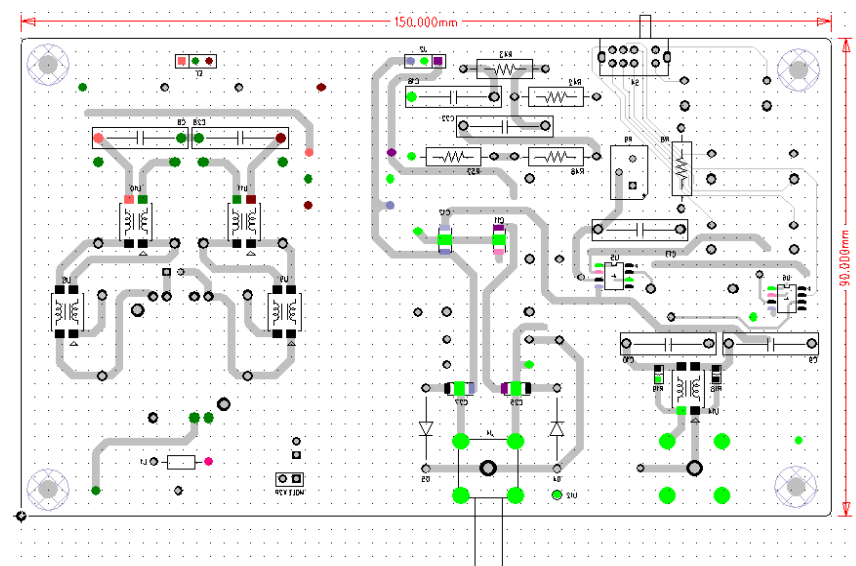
Bottom layer PCB layout of charge amplifier
